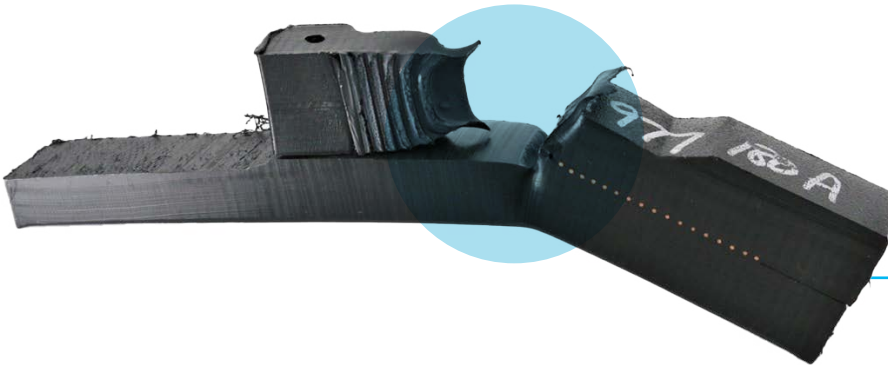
Figure 4 shows partial separation through the windings, followed by ductile fracture through the fitting socket wall. This is a Pass result.
